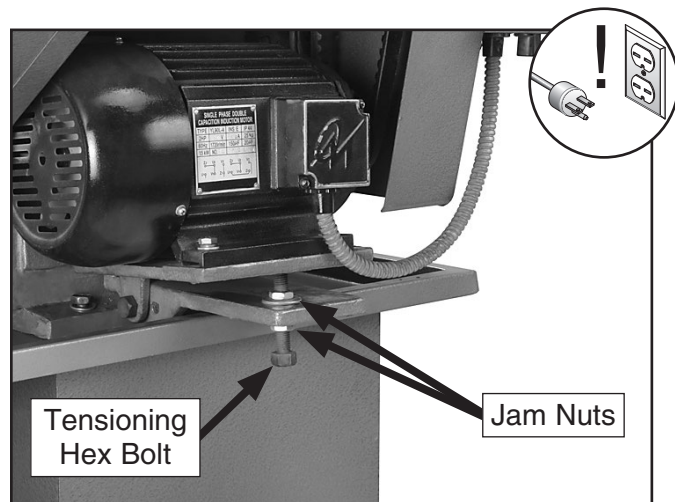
Motor V-belt tensioning hex bolt and jam nuts.
